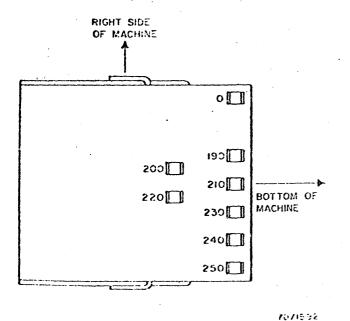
Fuser Transformer T1 Taps (Bottom View)
